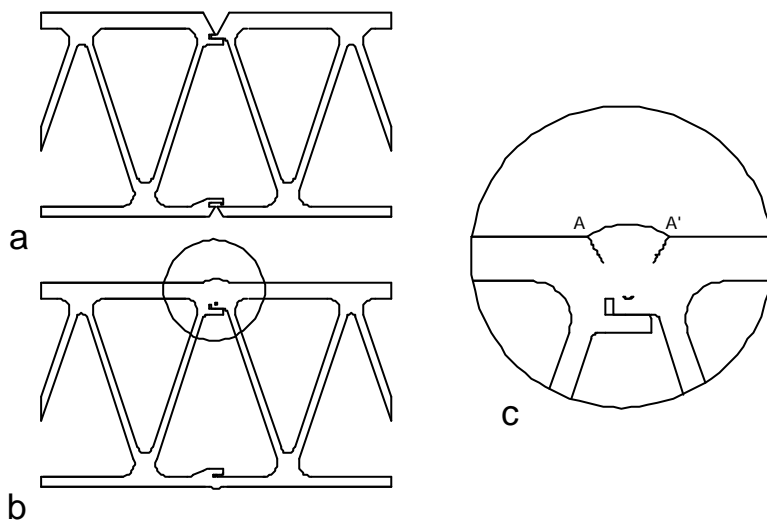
(a) the unwelded two extrusion profiles; (b) the welded connection; (c) the most likely location for cracks to initiate
